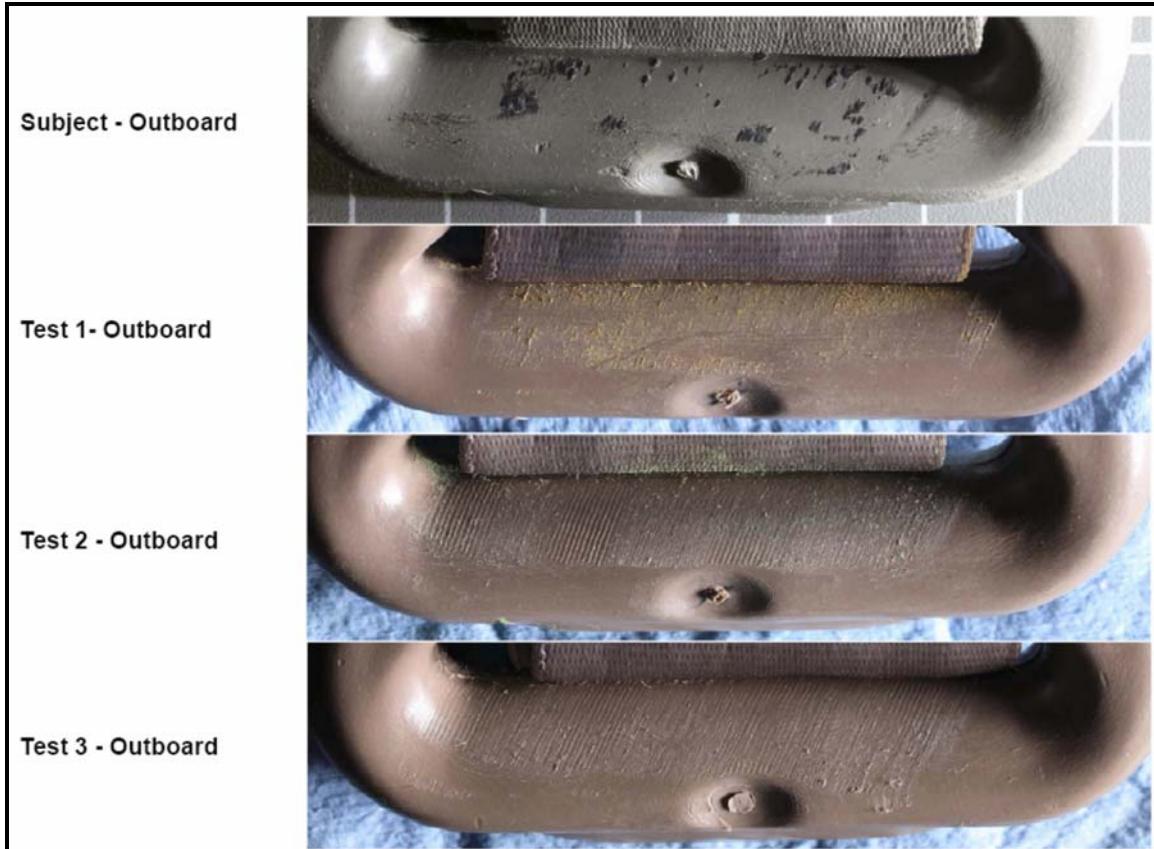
Marks on H.G.H.’s D-ring and Plaintiff’s test D-rings, outboard side ⁴¹
